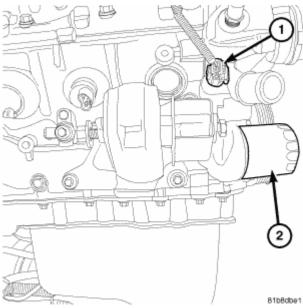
3.8L Oil Pressure Switch Courtesy of CHRYSLER LLC
